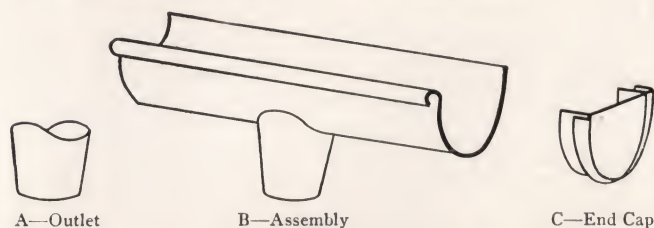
OUTLET, ASSEMBLY AND END CAP
